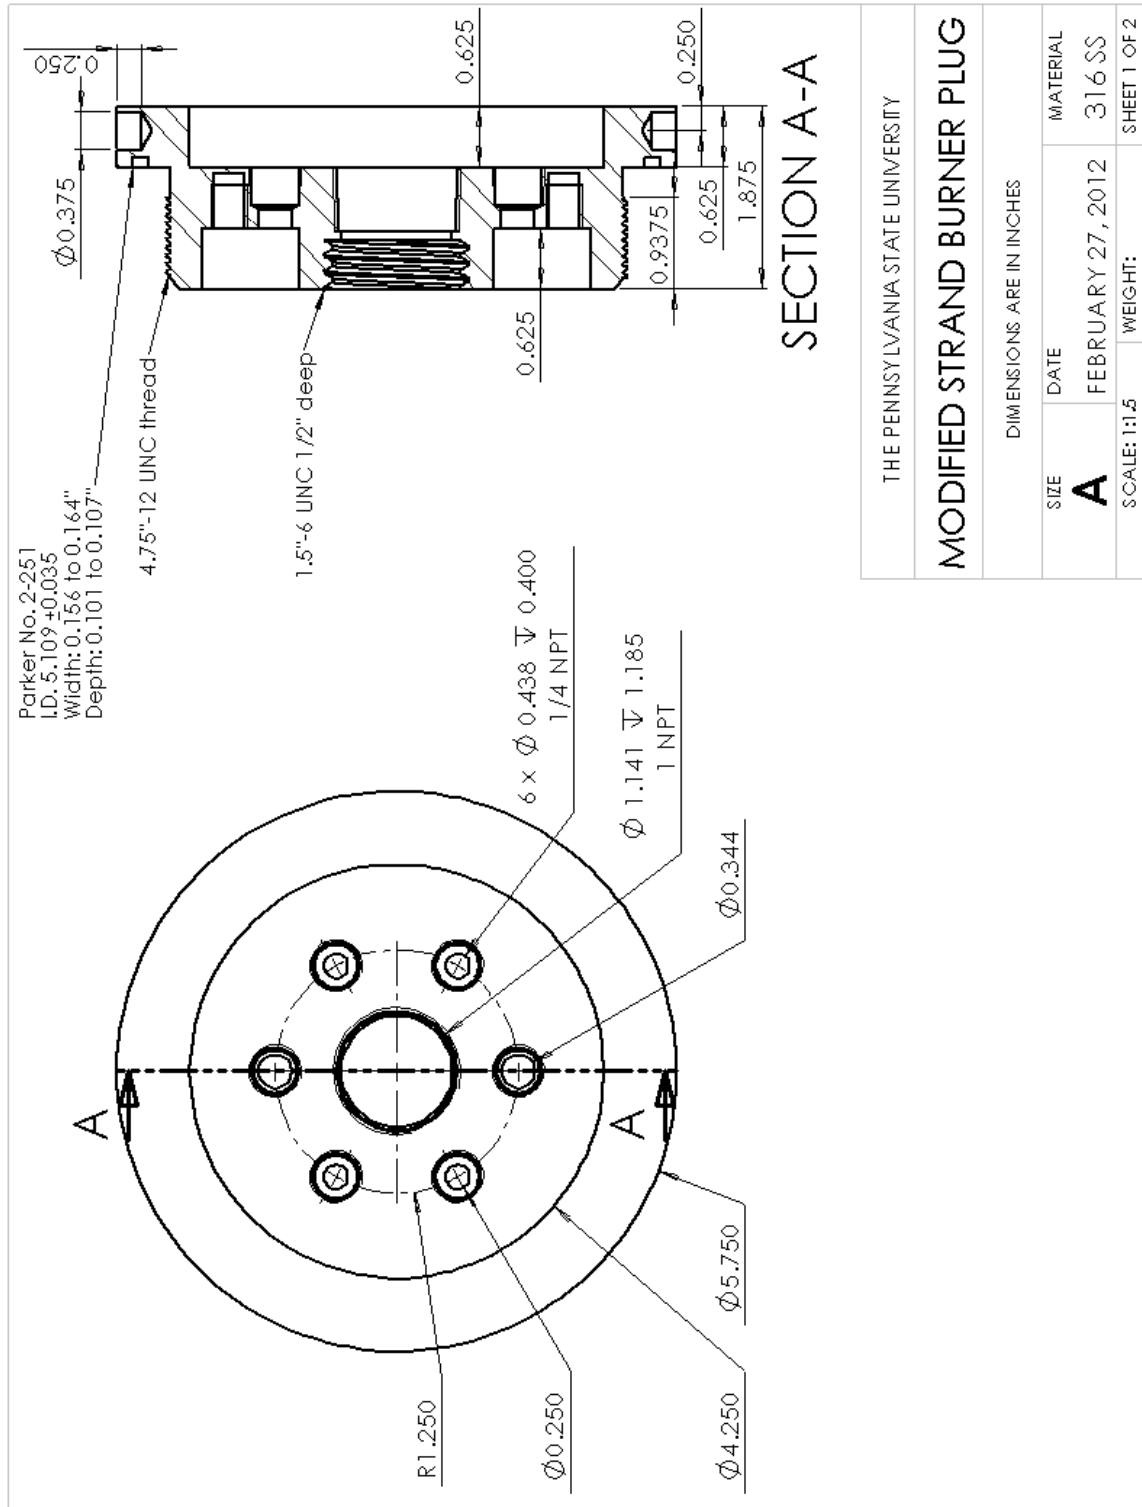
Drawing of modifications to top of strand burner plug to accommodate counterflow burner system.
